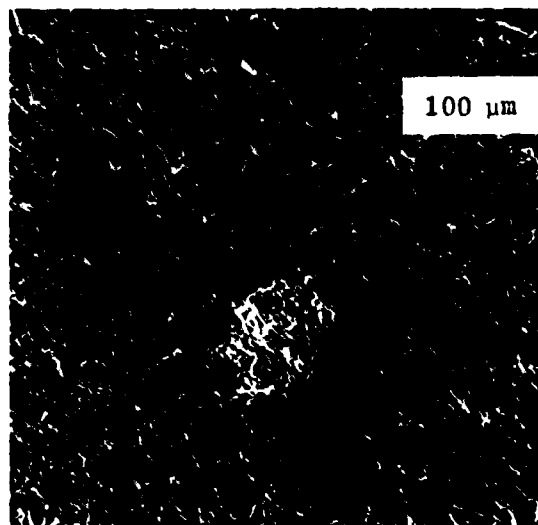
Fracture surface of a failure on loading during a stress-rupture test: 350 MPa. The flaw is a porous area away from the tensile surface.
